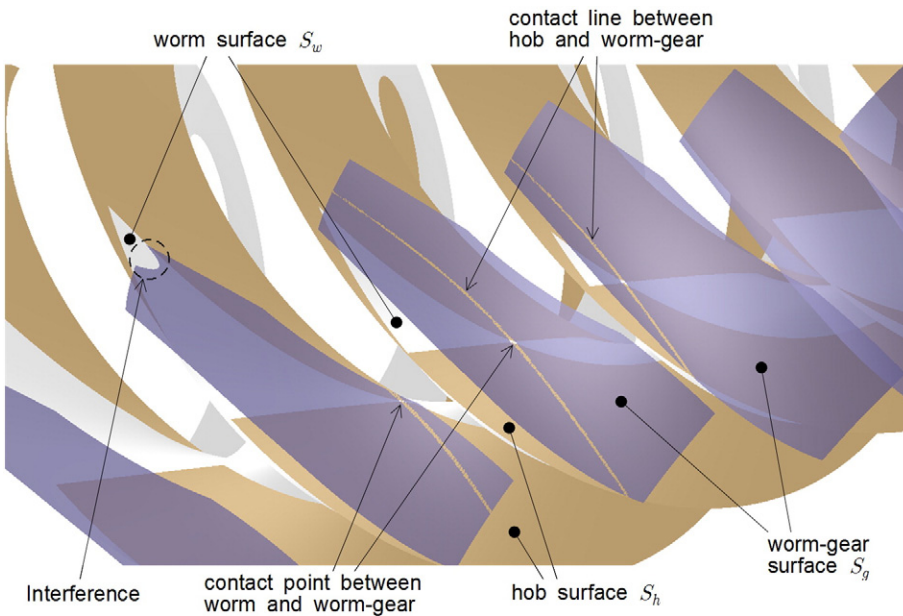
3D illustration of the geometric interference occurring between worm and worm gear tooth surfaces.
